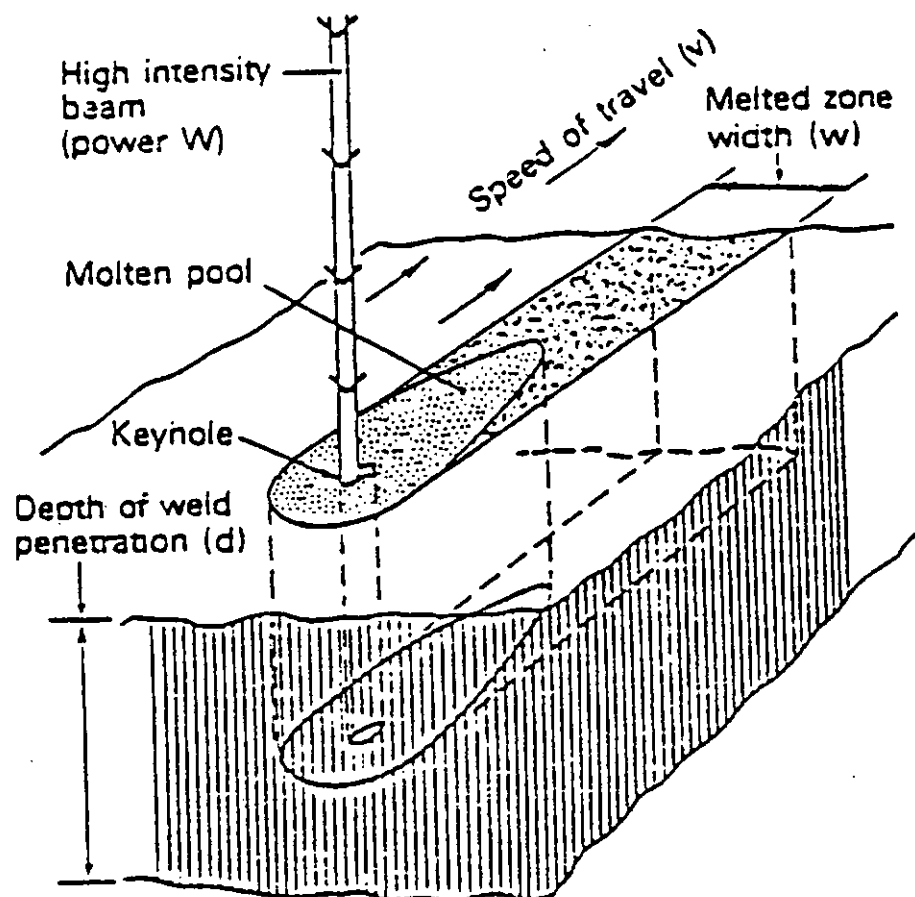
Keyhole mode of welding at high laser power intensity
